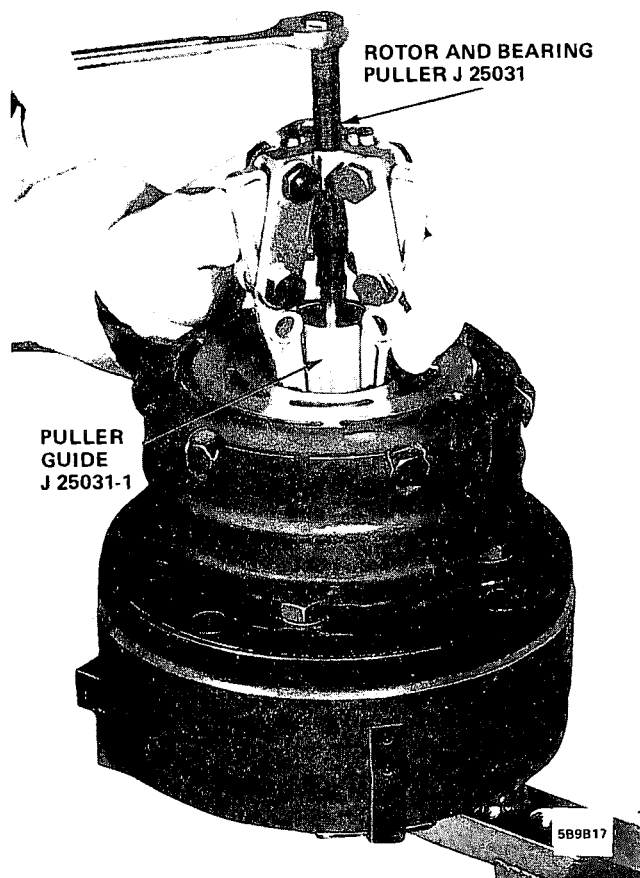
B-41 - Removing Clutch Rotor and Assembly Parts - 4 Cylinder Compressor
